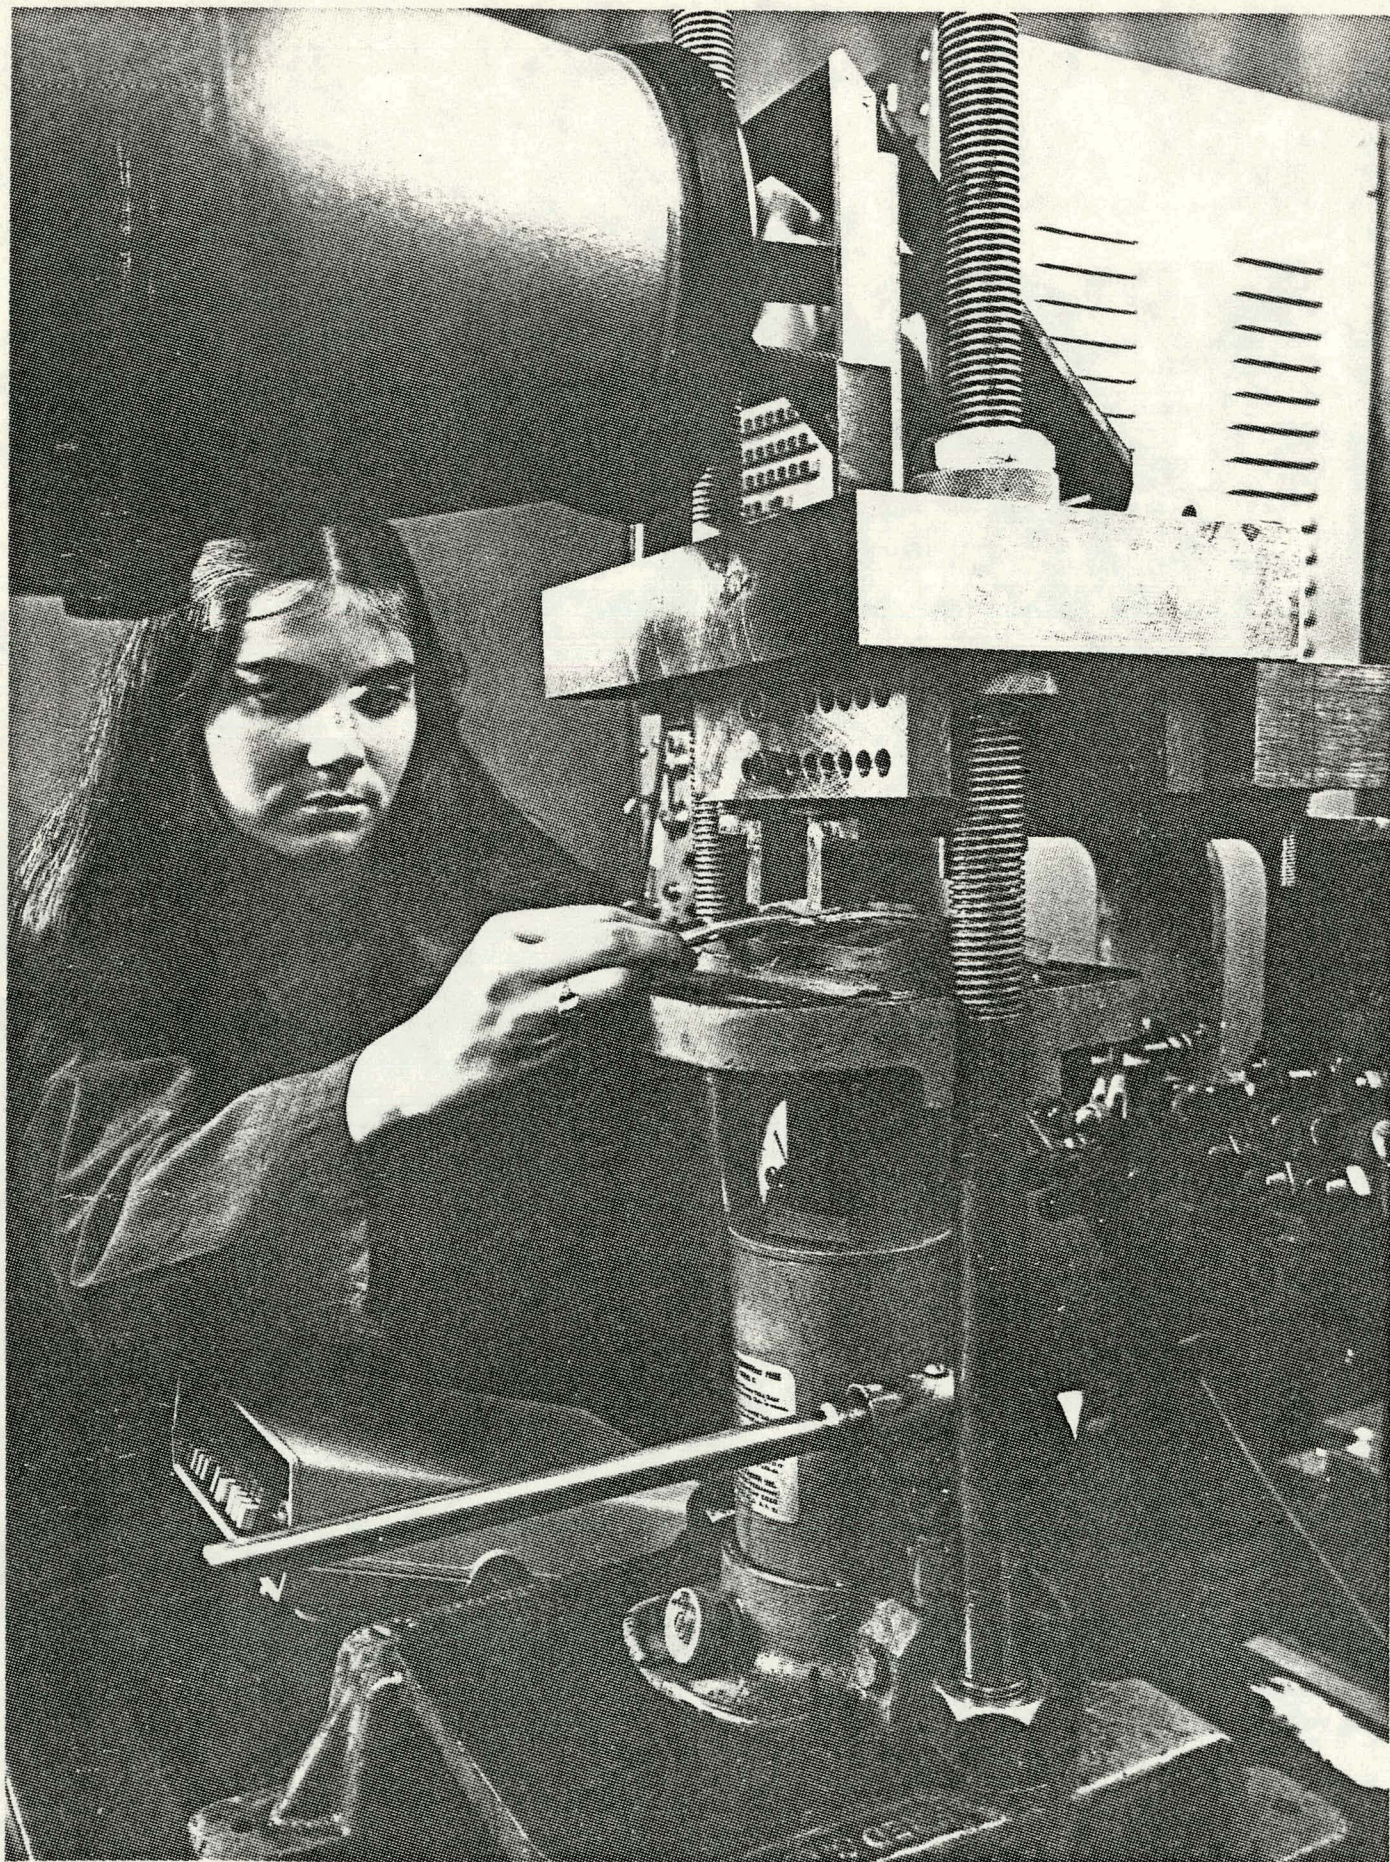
Operator is inserting a flexible contact assembly under one of the electrodes.
